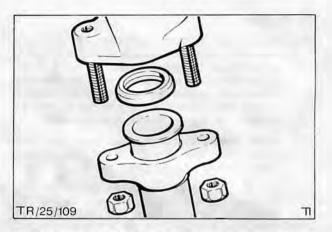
Exhaust manifold/front down pipe clamping with sealing ring
